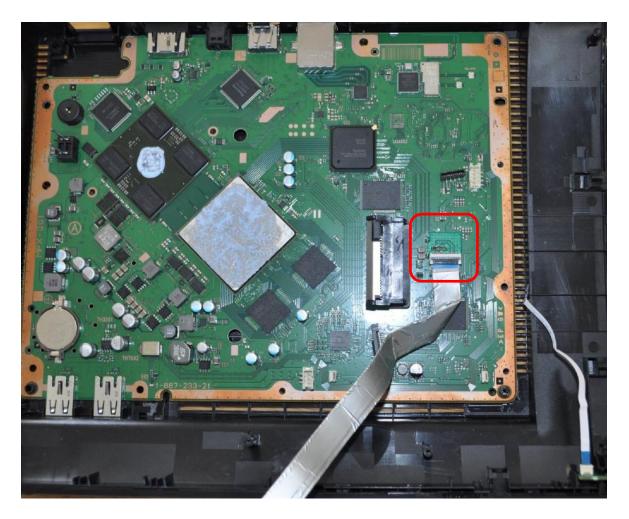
4xxx Model with installed flat(FFC) cable.
